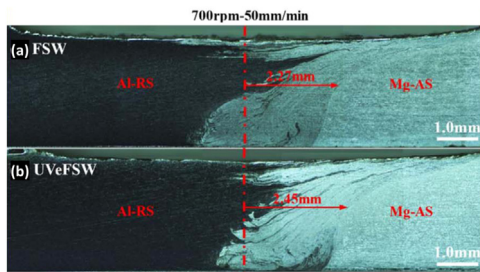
Transverse cross section macrographs of FSWed AZ31B/AA6061-T4 at 700 rpm and 50mm/min (a) without UVa and (b) with UVa [90].
